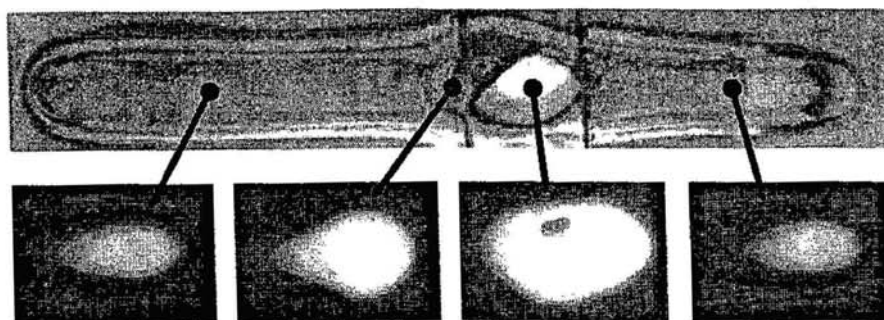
Visible images taken at different points of the welding experiment, correlated with a photograph of the weld seam.
